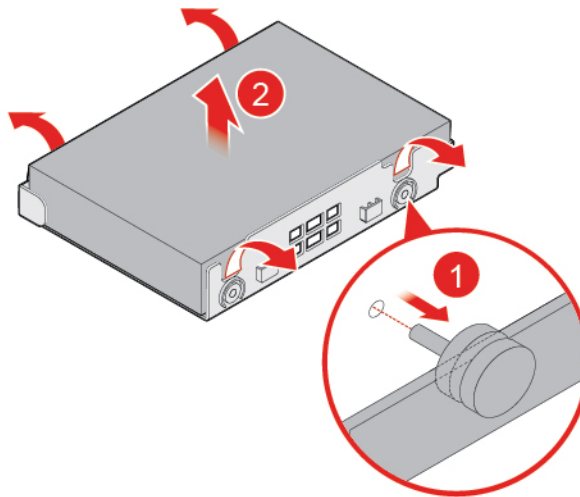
Removing the 3.5-inch primary storage drive or storage converter
